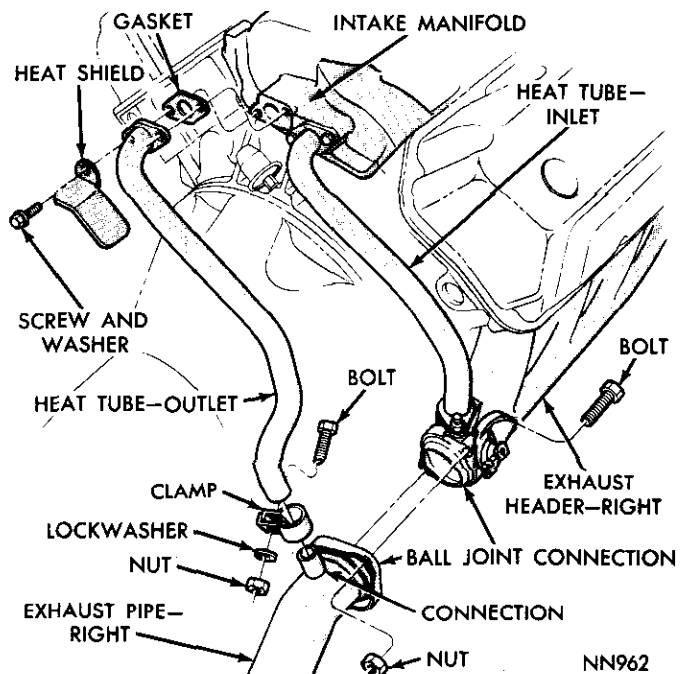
Intake Manifold Heat Tube Arrangement (426 Hemi Engine)
